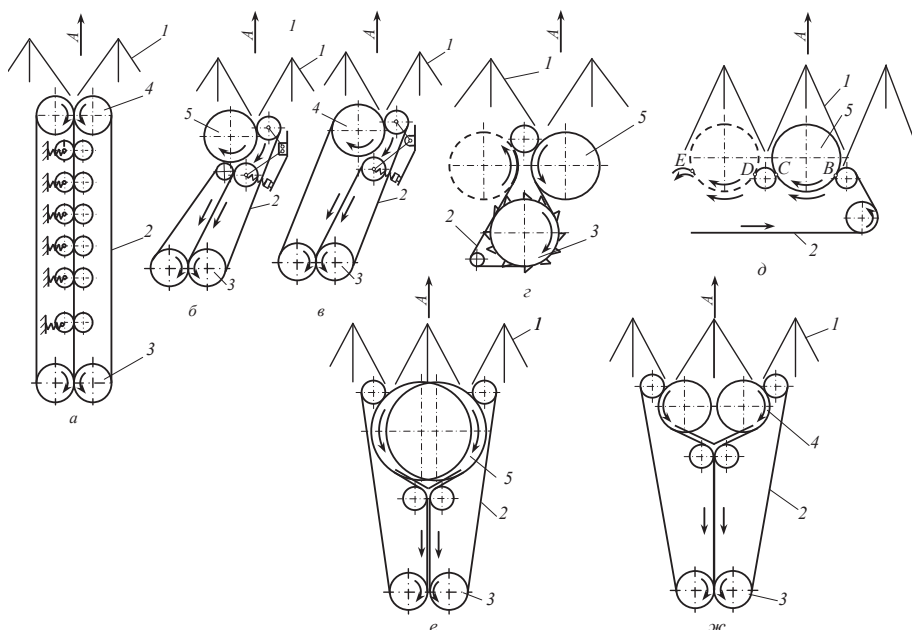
Schemes of the torching beds of flax combines: a – LT-7; b – «Unon»; v – LTV-4; g – «Cres»; d – TLN-1.5; e, g – self-propelled frontal machines; 1 – dividers; 2 – termobile belts; 3 – driving pulleys; 4 – driven pulleys; 5 – rubberized disks; the other moving parts are rollers.
